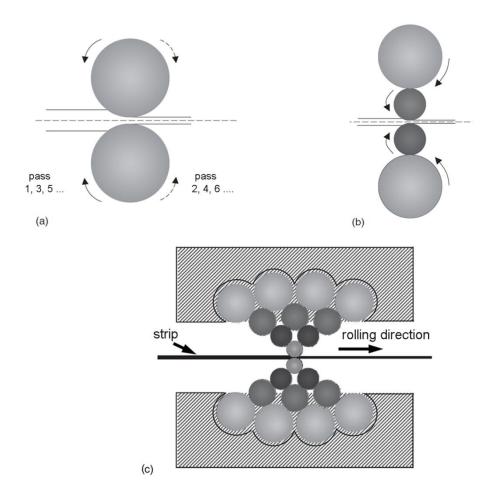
Examples of rolling mill stands: (a)2-high reversing mill stand (b) quarto (4-high) mill stand (c) cluster mill stand
